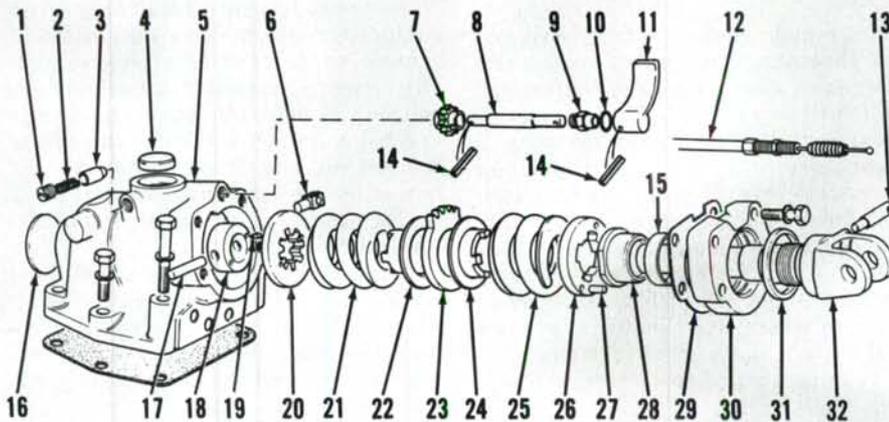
Exploded view of selective rate draft sensing unit used on some models.
